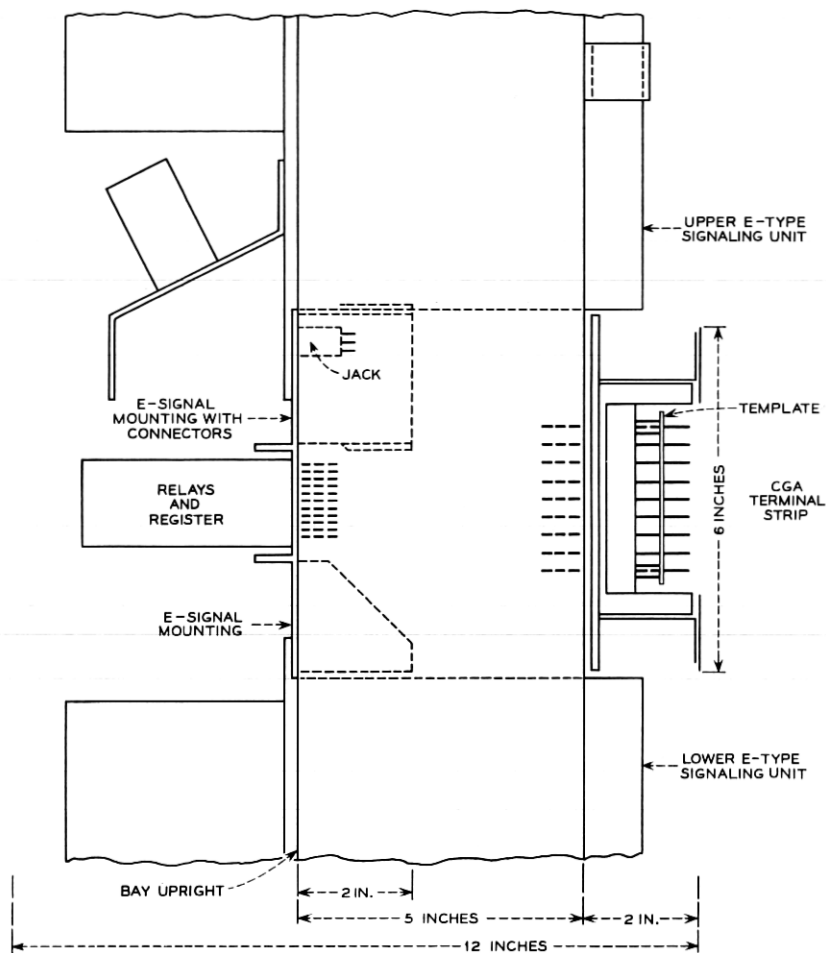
Carrier group alarm and E-type signaling shelves, showing arrangement of equipment.
